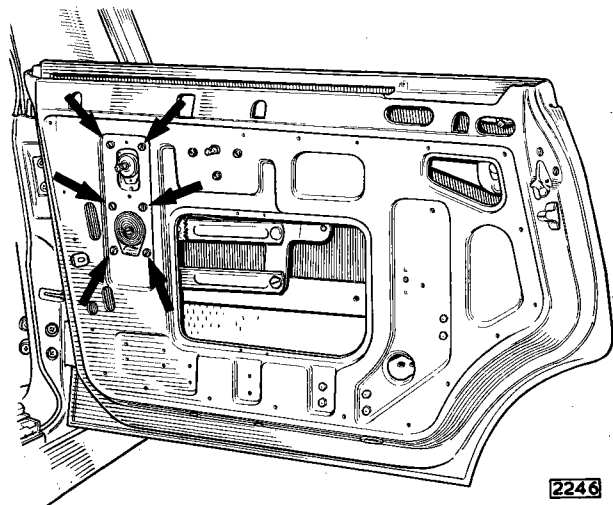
Showing the screws securing the rear window winding mechanism to the door frame
